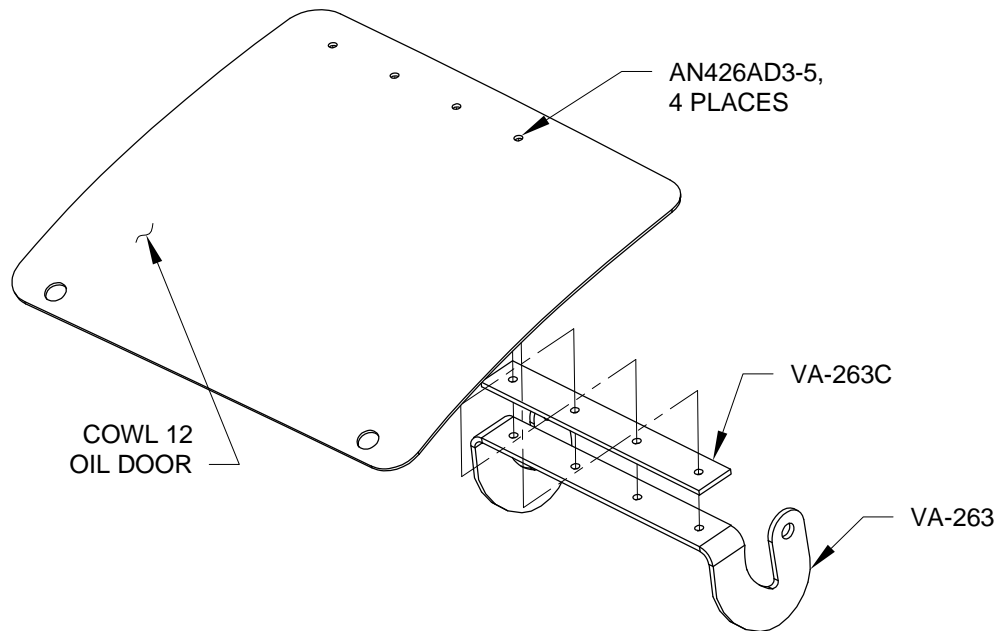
TOP COWL OIL DOOR OPENING
